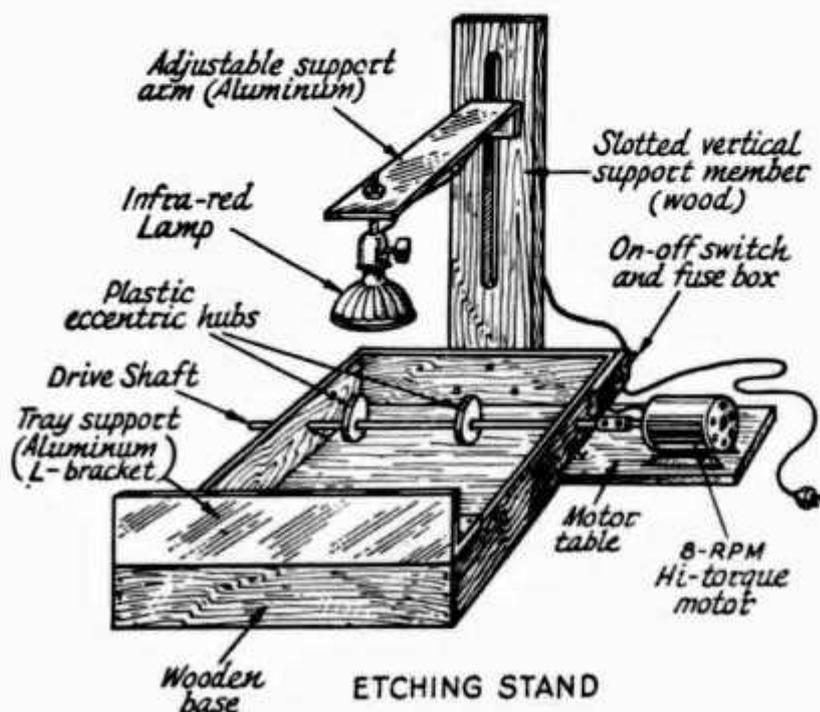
Details of a home-made etching stand which can be built at a moderate cost. The actual dimensions will have to be determined by the builder, based on the size tray he will use to contain the etchant bath. The solution tray is placed on the two eccentric hubs of the drive shaft, its rear end resting on the aluminum L bracket in the foreground. The hubs raise and lower the tray as the shaft turns, thus providing agitation of the solution. An infra-red lamp is supported by an arm which can be raised or lowered to a distance that maintains a 100-degree solution temperature. A wing nut and bolt secure the lamp arm to the vertical support member at the rear of the sketch. Almost any low r.p.m. motor will work, but an 8- or 10-rpm type is preferred.
